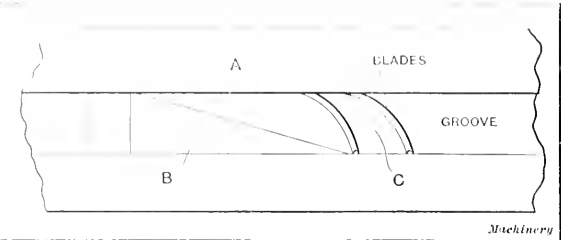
View of a Groove in the Turbine Rotor showing Method of starting to replace the Blades
